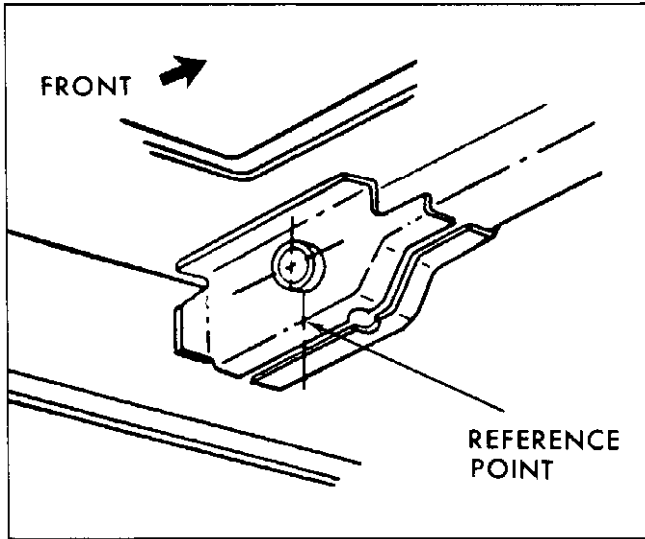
Side Rail at Spring Rear Shackle Hole
